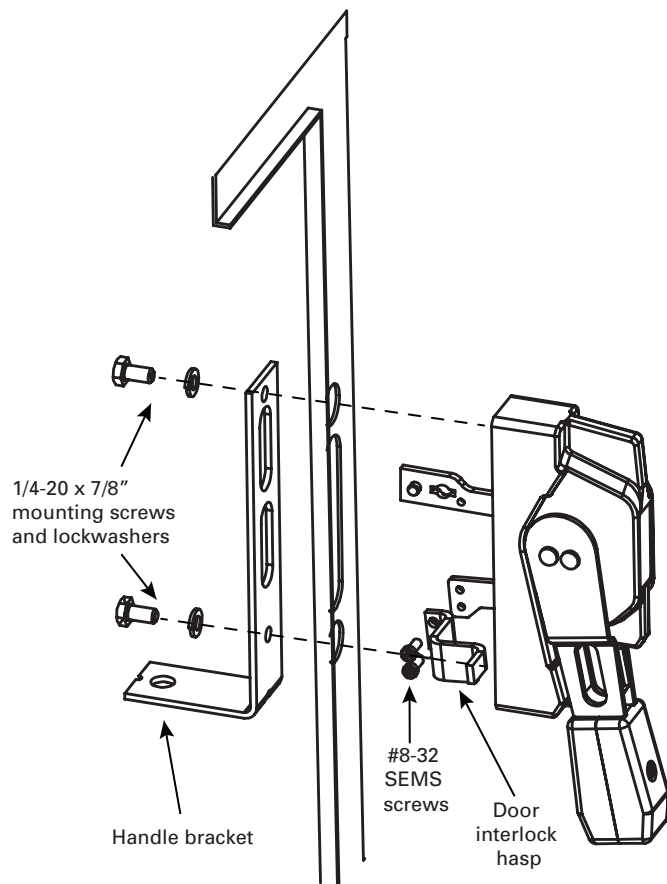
Assemble flange handle onto the enclosure using supplied mounting screws, lock washers and bracket as shown. Then install the door interlock hasp using the supplied screws, as shown. Tighten screws securely.
